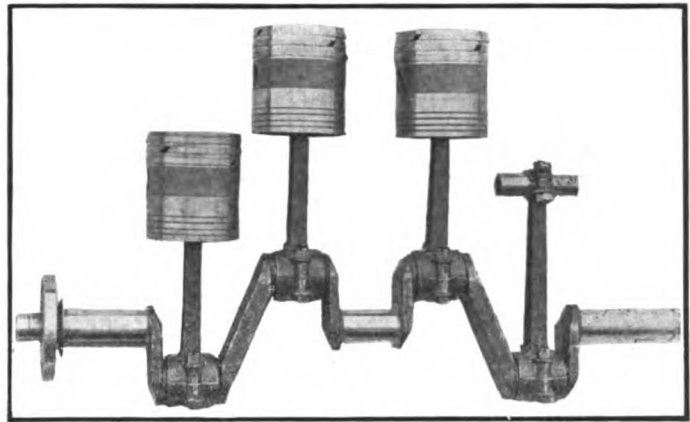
The crankshaft with the connecting rods and pistons in place, showing a flanging for the flywheel and other refinements
